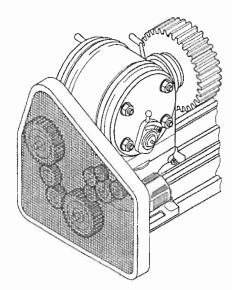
Example of an enclosing guard totally preventing access to transmission machinery
